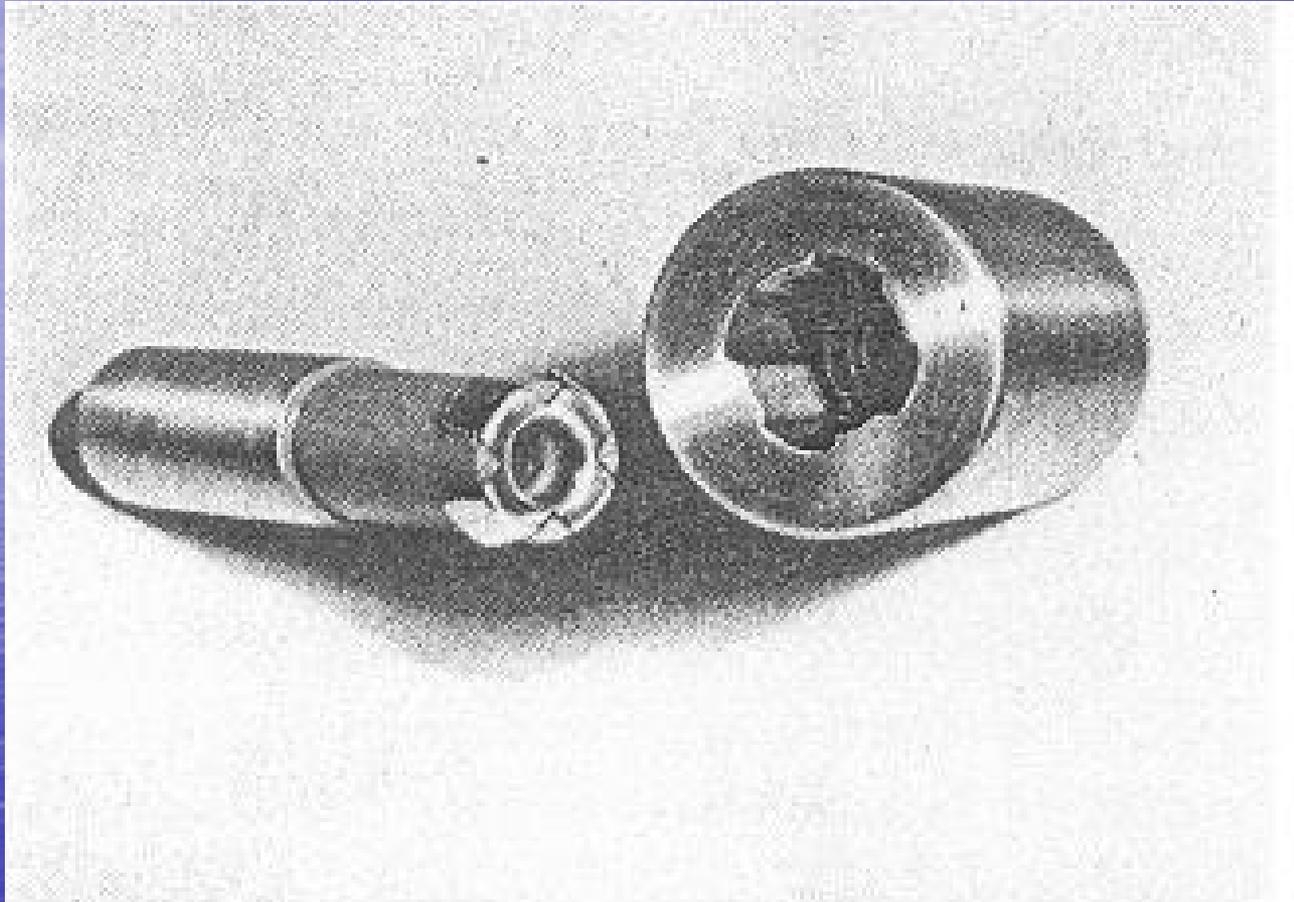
Electro-broaching slots in a tool steel part. (*Courtesy, The Ex-Cell-O Corporation*)
